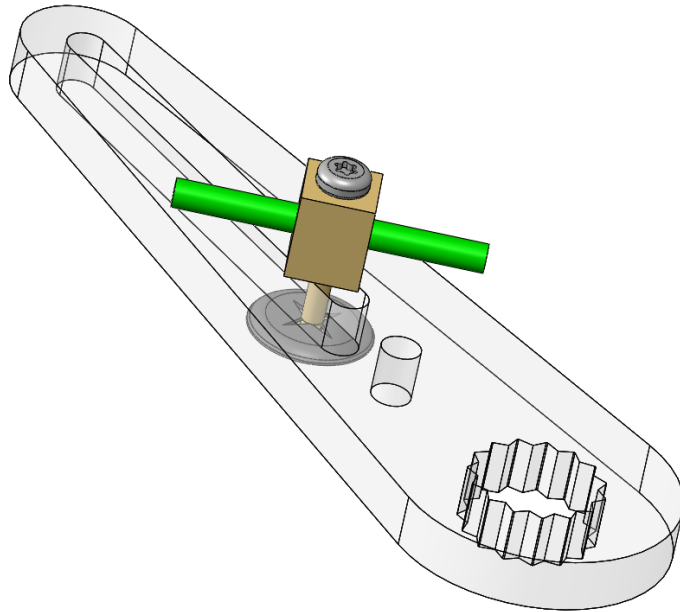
Assembly of Pin Slider, Rigid Driving Rod, and Servo Horn
